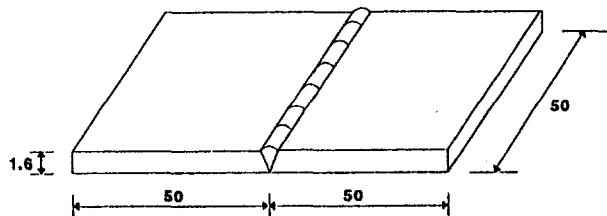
Weld joint to be used for metallurgical investigation (all dimensions in mm)
